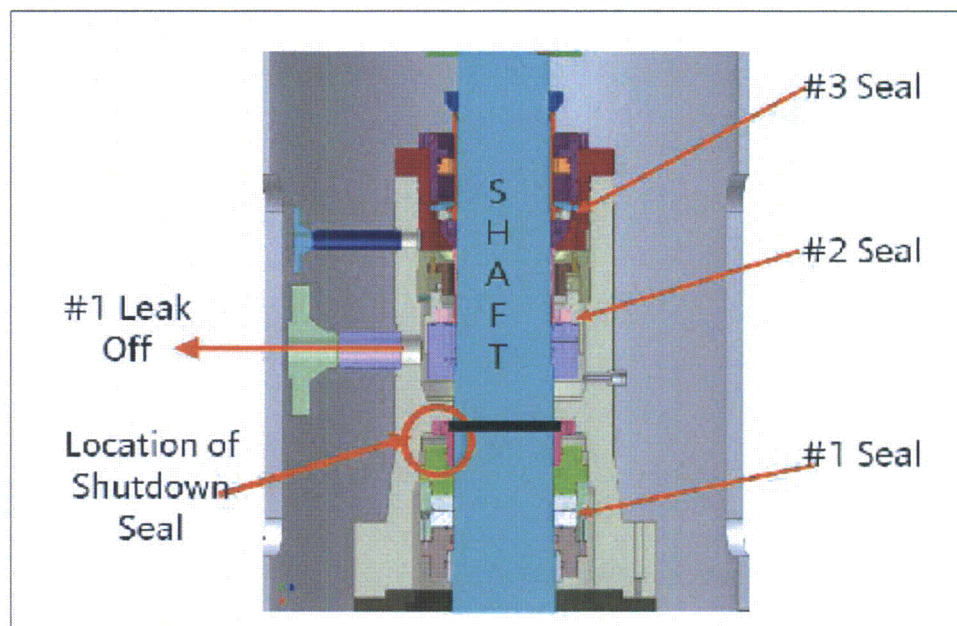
Cut-Away of RCP Seal Package With SDS
